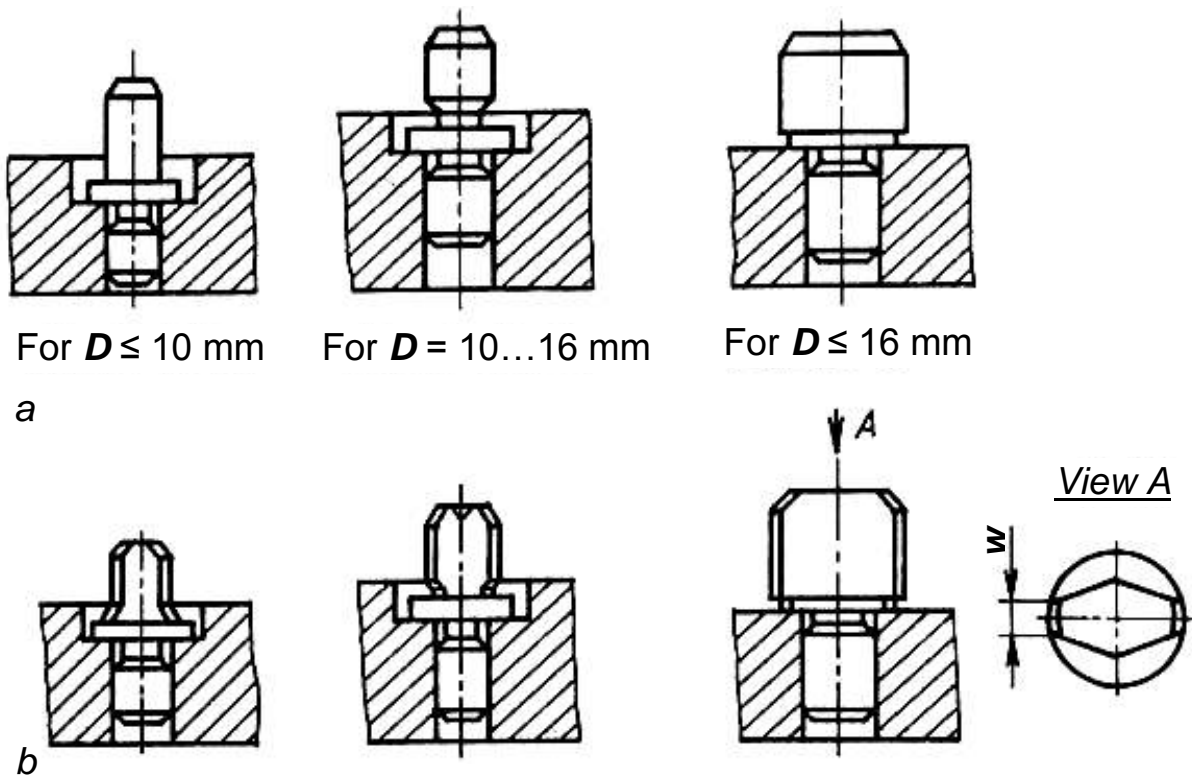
Mounting fingers: *a* – cylindrical; *b* – diamond
